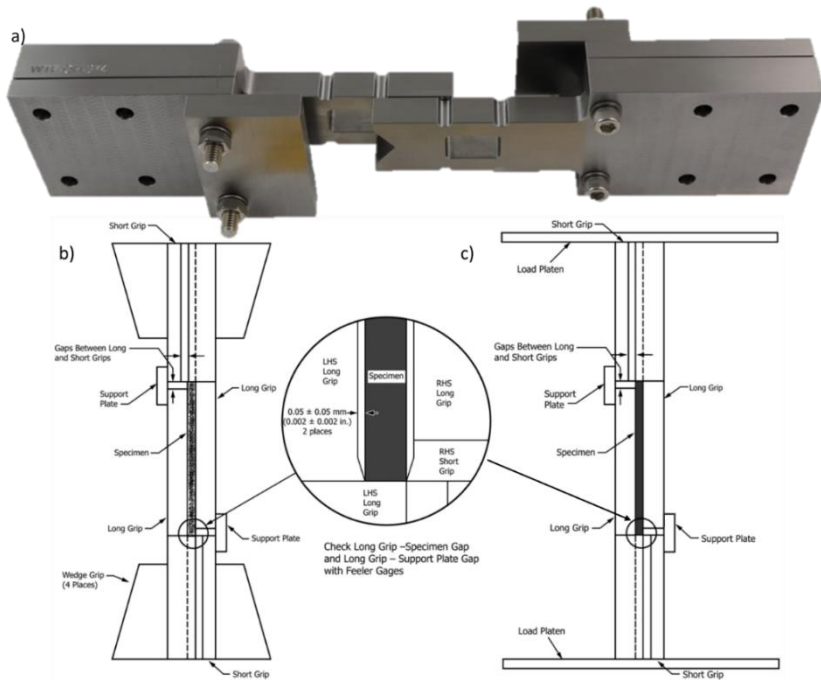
a) Example of an ASTM D6484 test fixture produced by Wyoming Test Fixtures [76]; b) Test fixture clamped between grips for shear-loading and c) Test fixture loaded between compression platens for end-loading [83]
